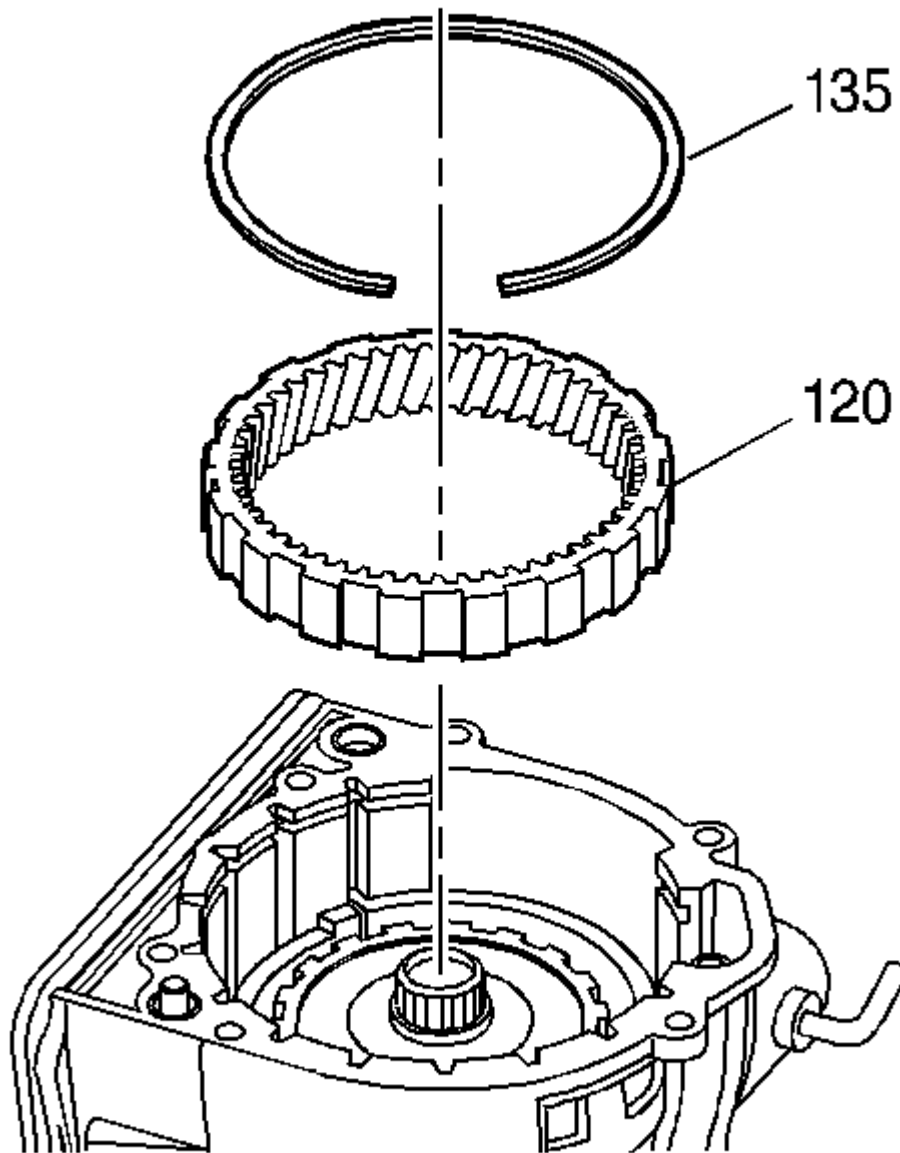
View Of Final Drive Internal Gear With Groove Aligned Up
